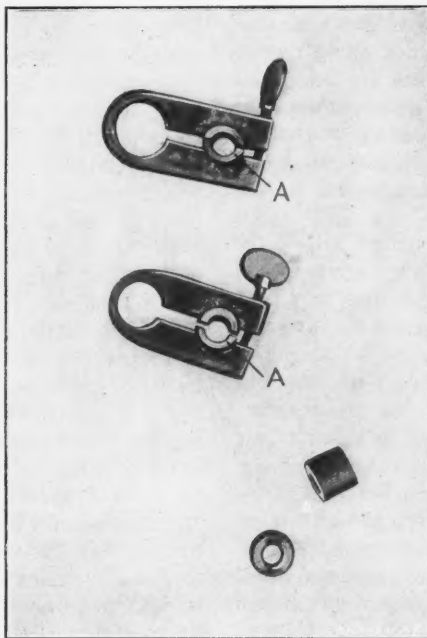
Laps and Holders used in Finishing Bearings to Size
